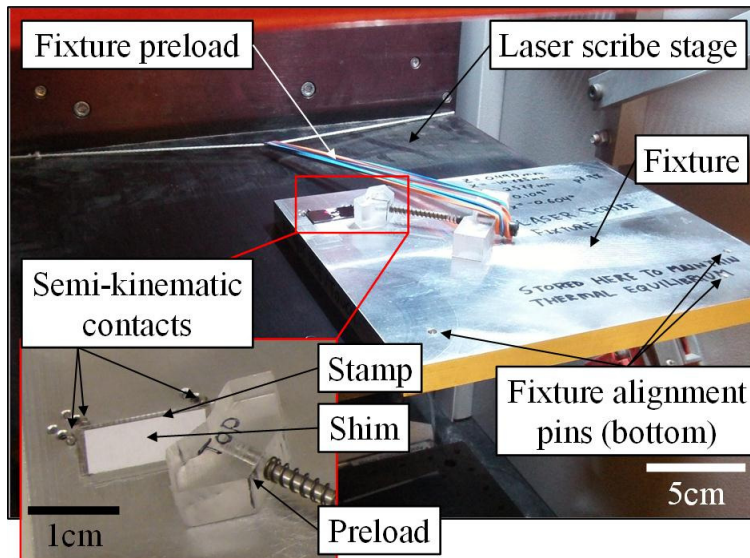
Glass stamp in laser scribe fixture, which is used to align the gage patterning to the coordinate frame defined by the edges of the stamp.
